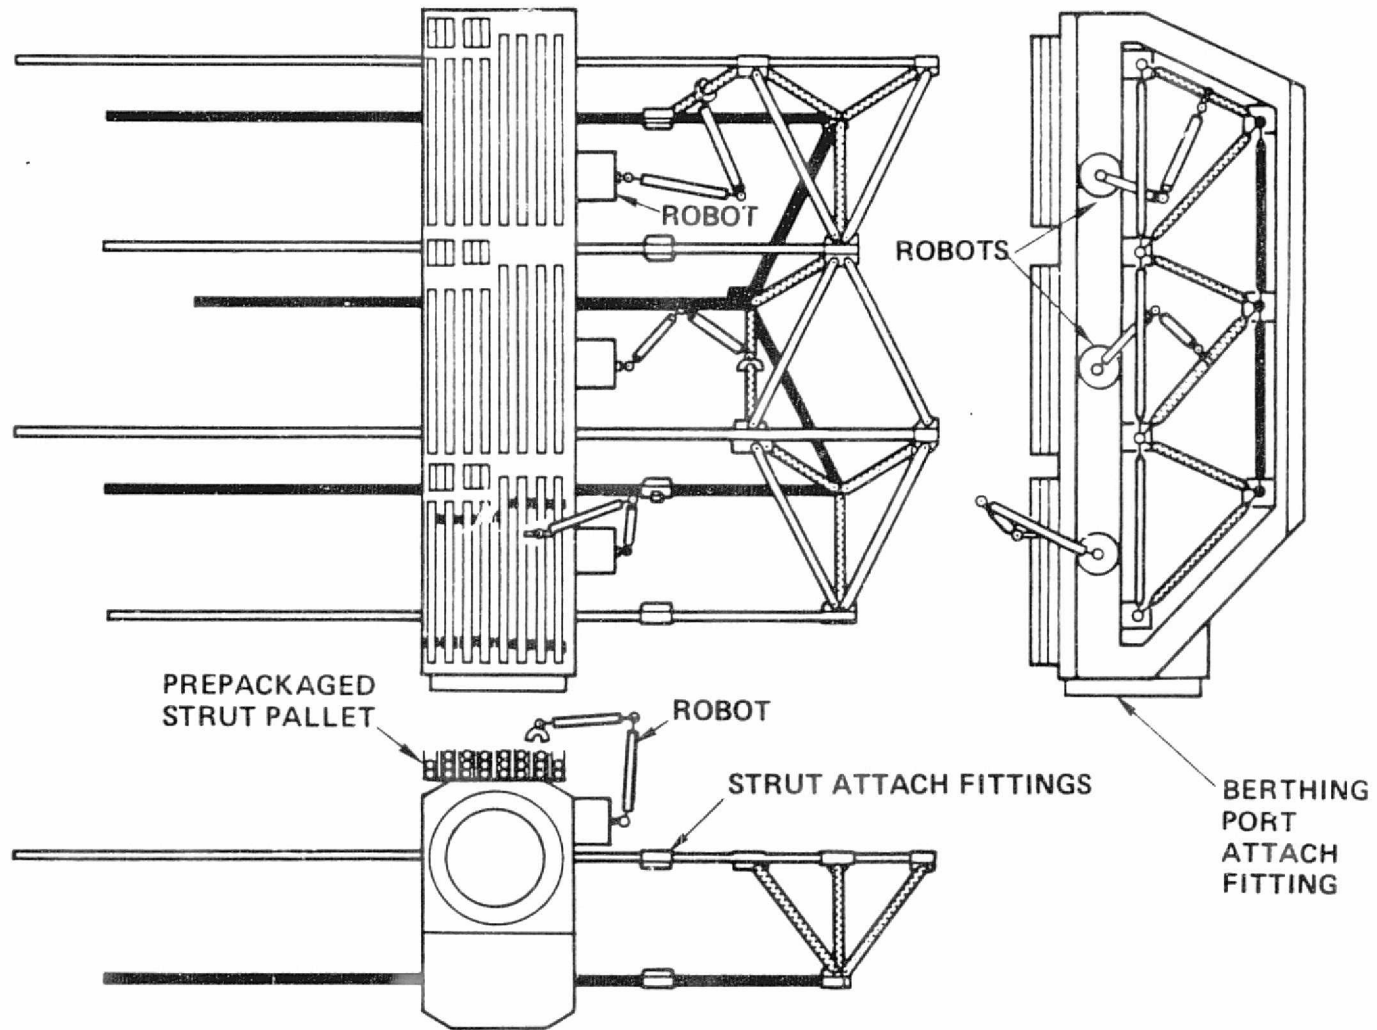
SPS TA-1 and TA-2 Antenna Assembly Fixture
